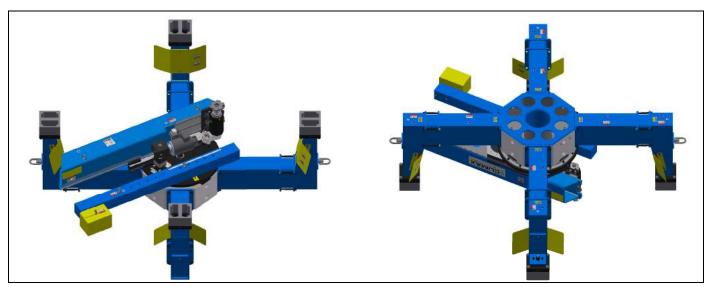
BLOCK RISER AND LEG ASSEMBLY
